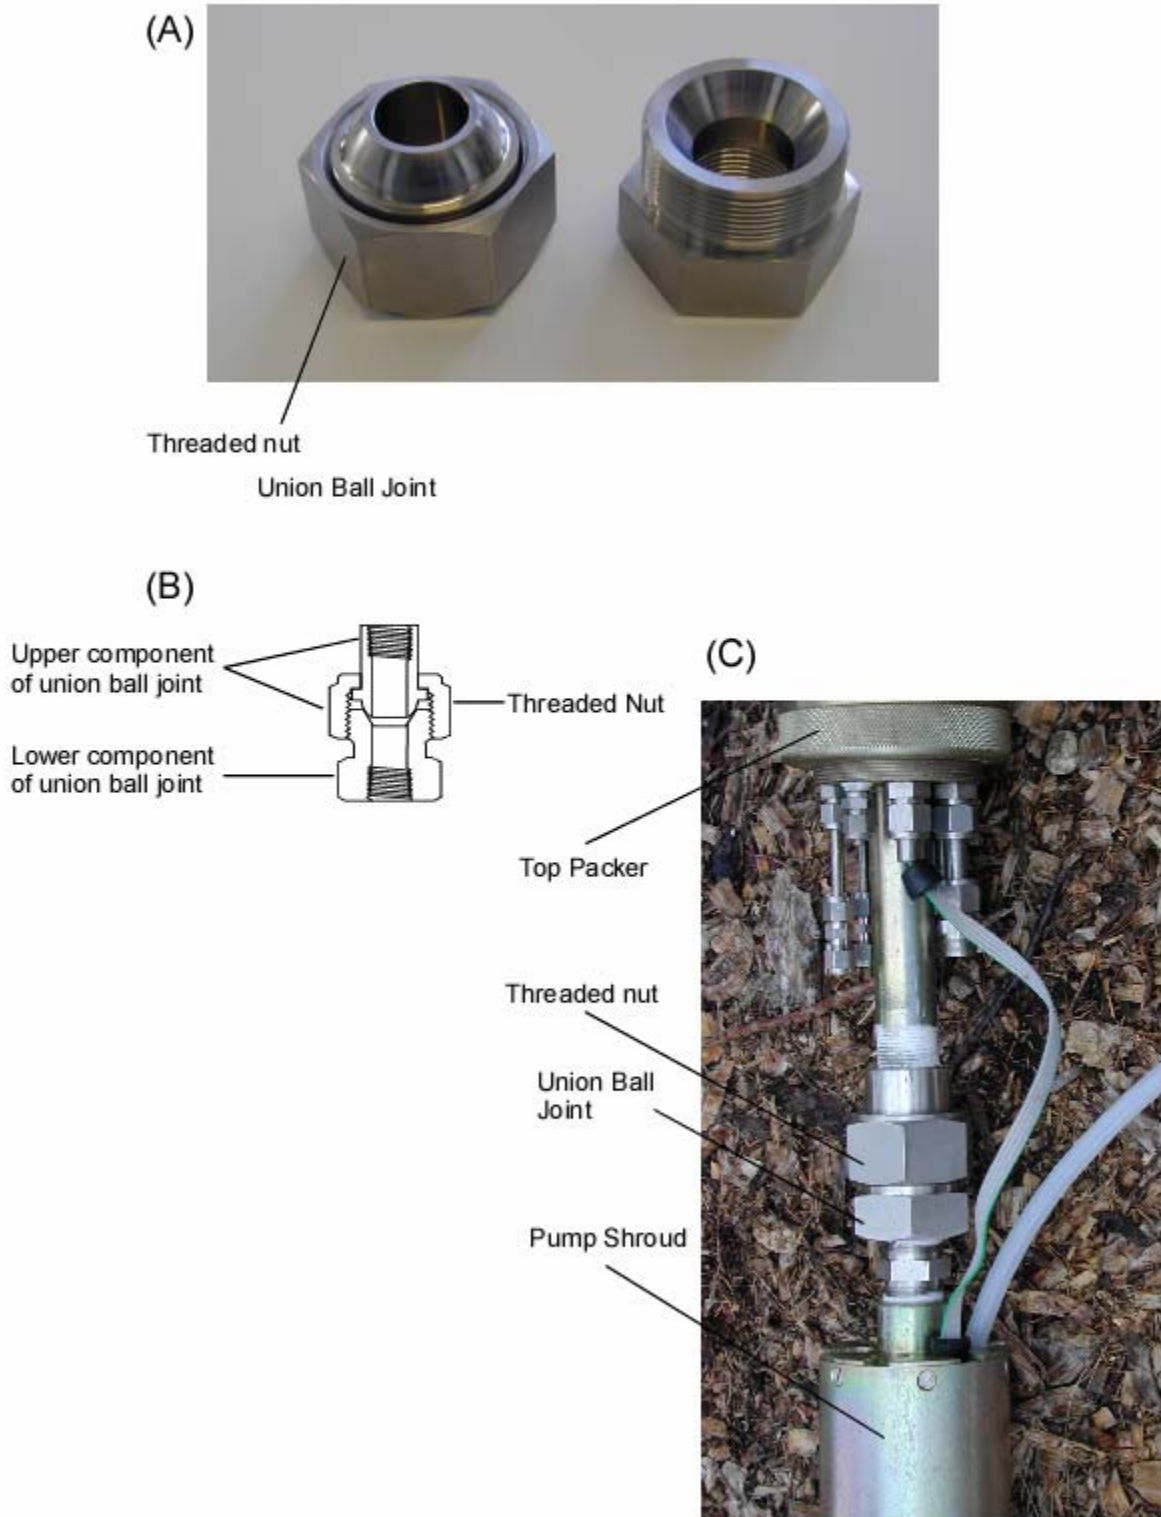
(A) Photograph of the two parts of a union ball fitting, (B) a schematic diagram of a union ball fitting, and (C) a photograph of a union ball fitting connecting the top packer to the pump shroud.
